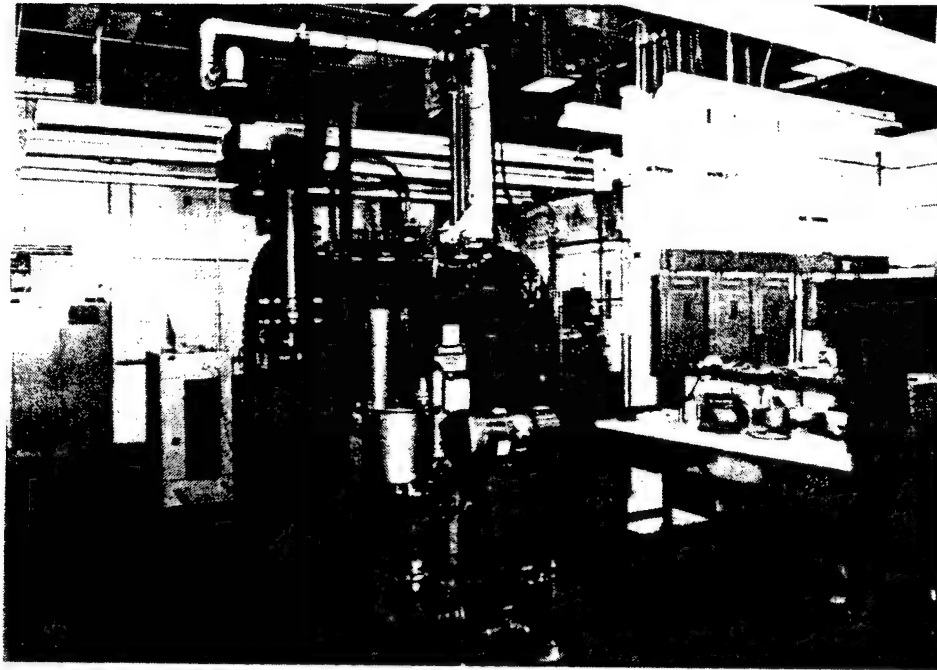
Opposite Side View of Spray Casting Equipment During Wear- and Corrosion-Integrated Test Series.
